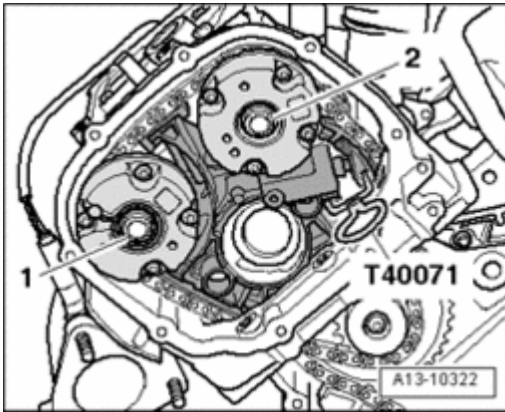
Identifying Bolts On Left Cylinder Head And Removing Both Camshaft Adjusters
